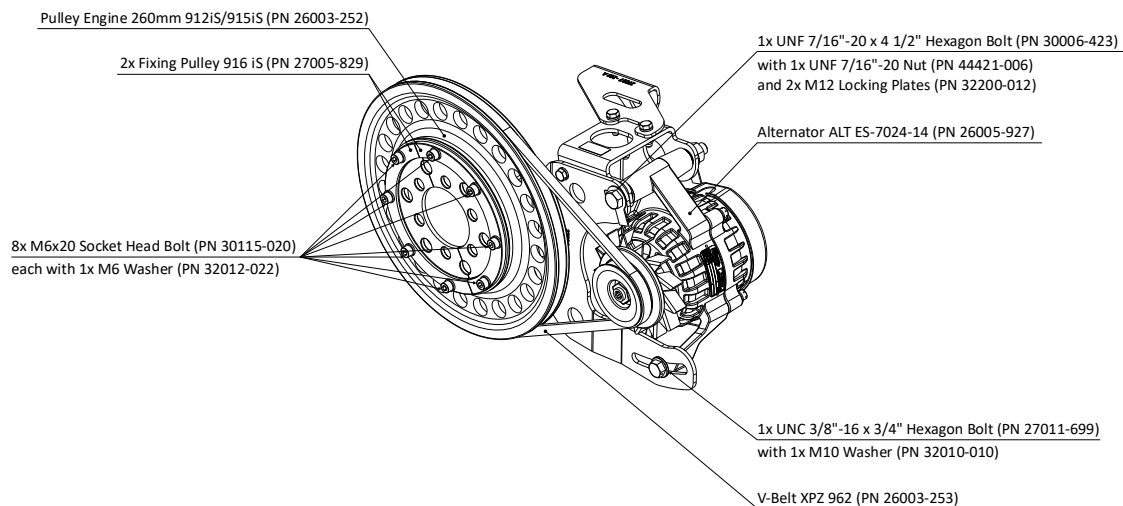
Isometric View Ext. Alternator Kit 70A Rotax 916iS
